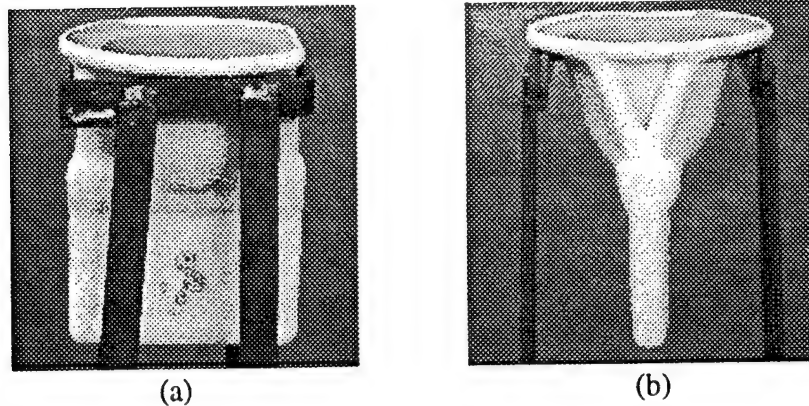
Photographs of an investment plate mold for use in the CMU cooling rate experiments a) long side view showing holes for thermocouples and b) short side view.
